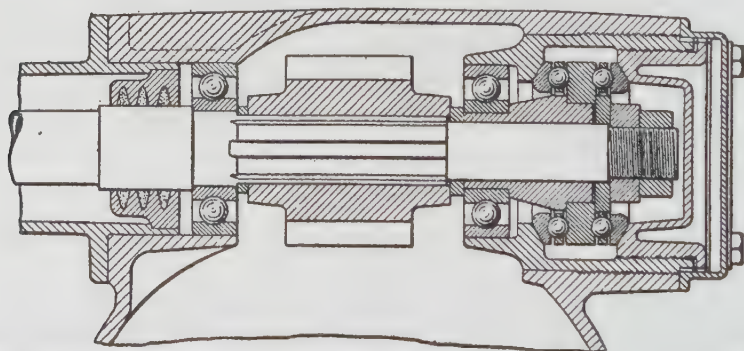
MOUNTING OF WORM WITH DOUBLE BALL THRUST BEARINGS.
